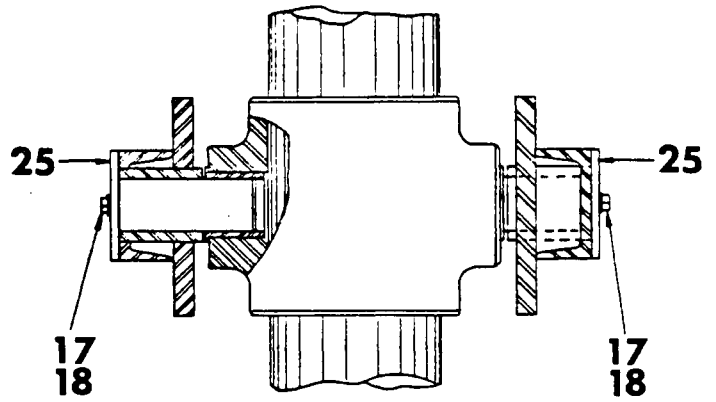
C - HAND CONTROL BOX ASSEMBLY
